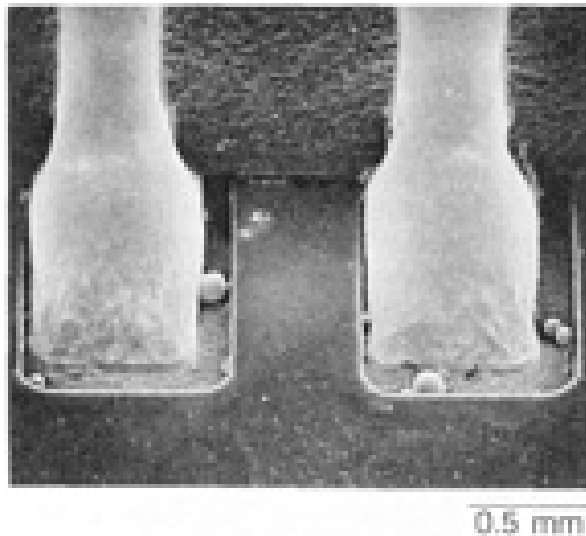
SCANNING ELECTRON MICROGRAPH OF SOLDER BALLS ON A LEADLESS CERAMIC CHIP CARRIER SOLDER JOINT. COURTESY OF SANDIA NATIONAL LABORATORIES
